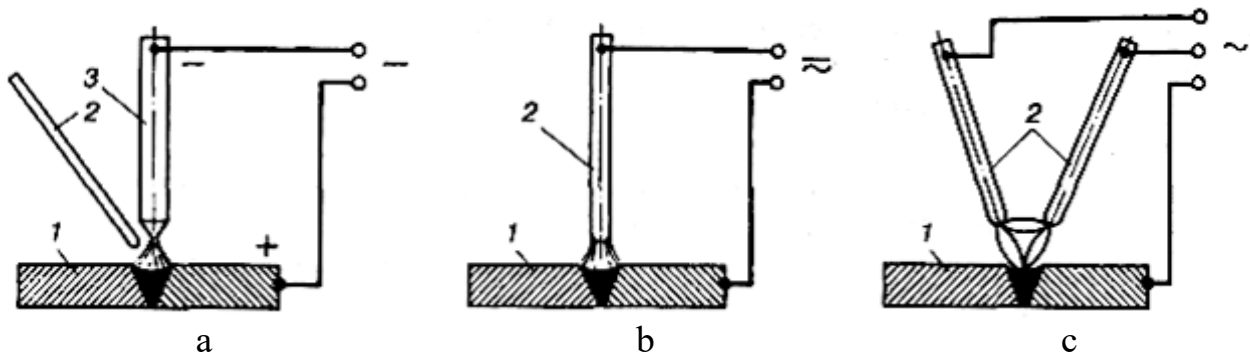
Schemes of main types of arc welding: a) on the way Benardosa (1 - welding a product, 2 - additive material, 3 - a coal or graphite electrode); b) on Slavyanov's way (1 - welding a product, 2 - a metal electrode that melts); c) a three-phase arc (1 - welding a product, 2 - electrodes are isolated).
